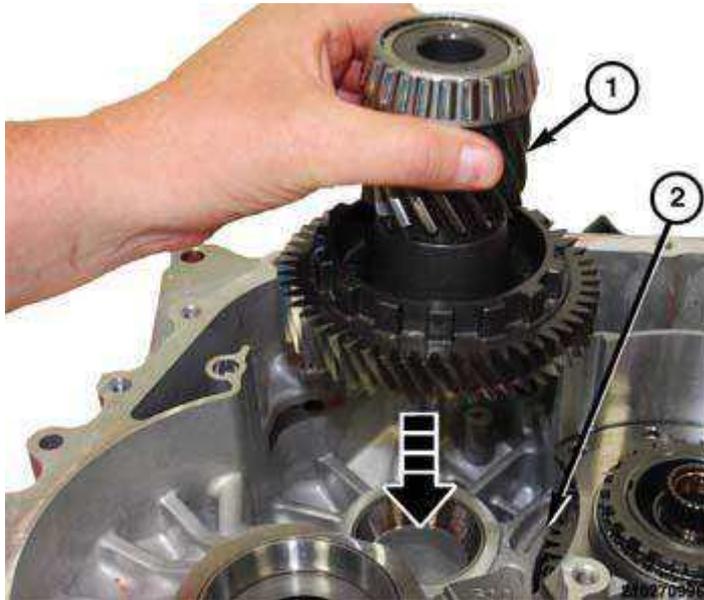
Transfer Driven Gear Assembly & Transaxle
